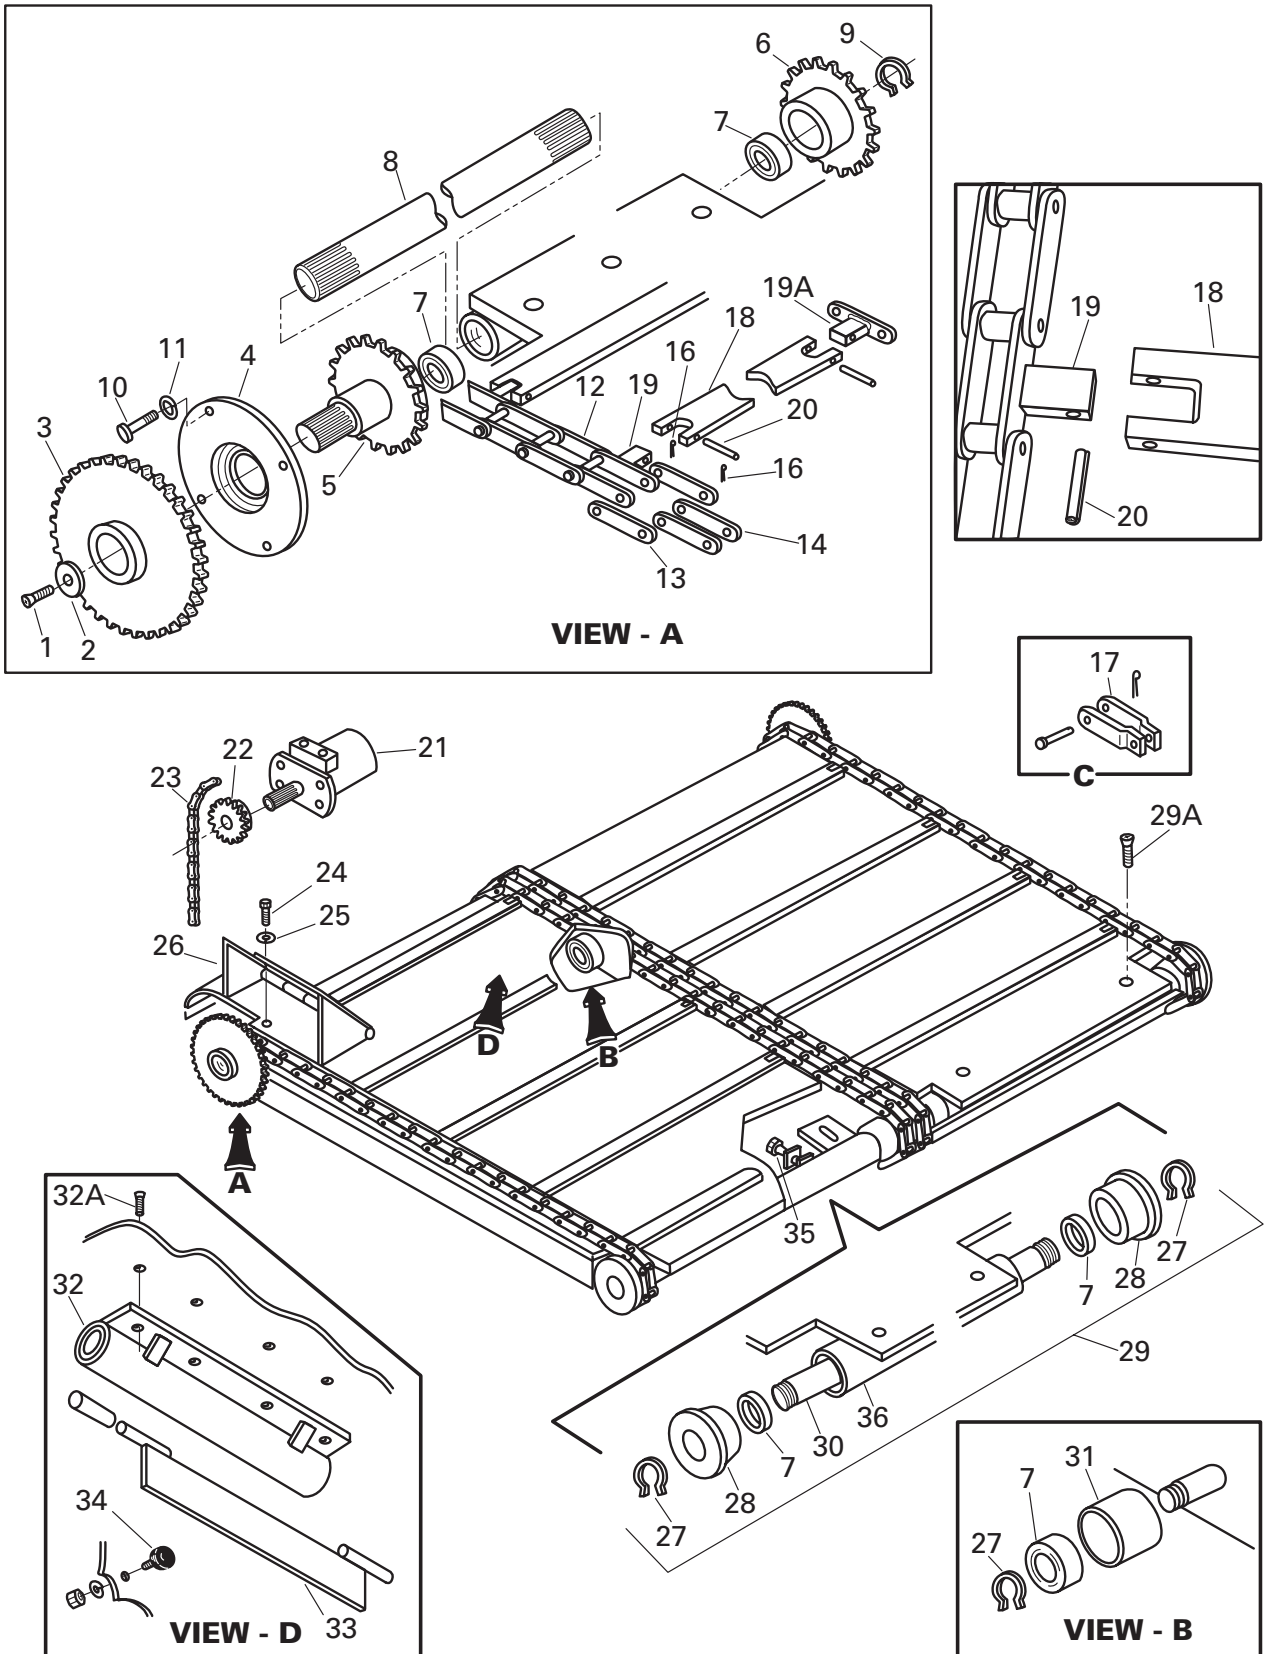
CONVEYOR DRIVE ASSEMBLY
